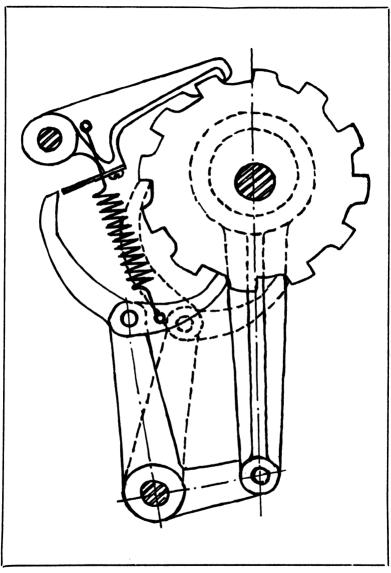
Ink Sketch of a Ratchet-and-pawl Mechanism Designed Especially for Moving Heavy Loads Intermittently and Accurately
